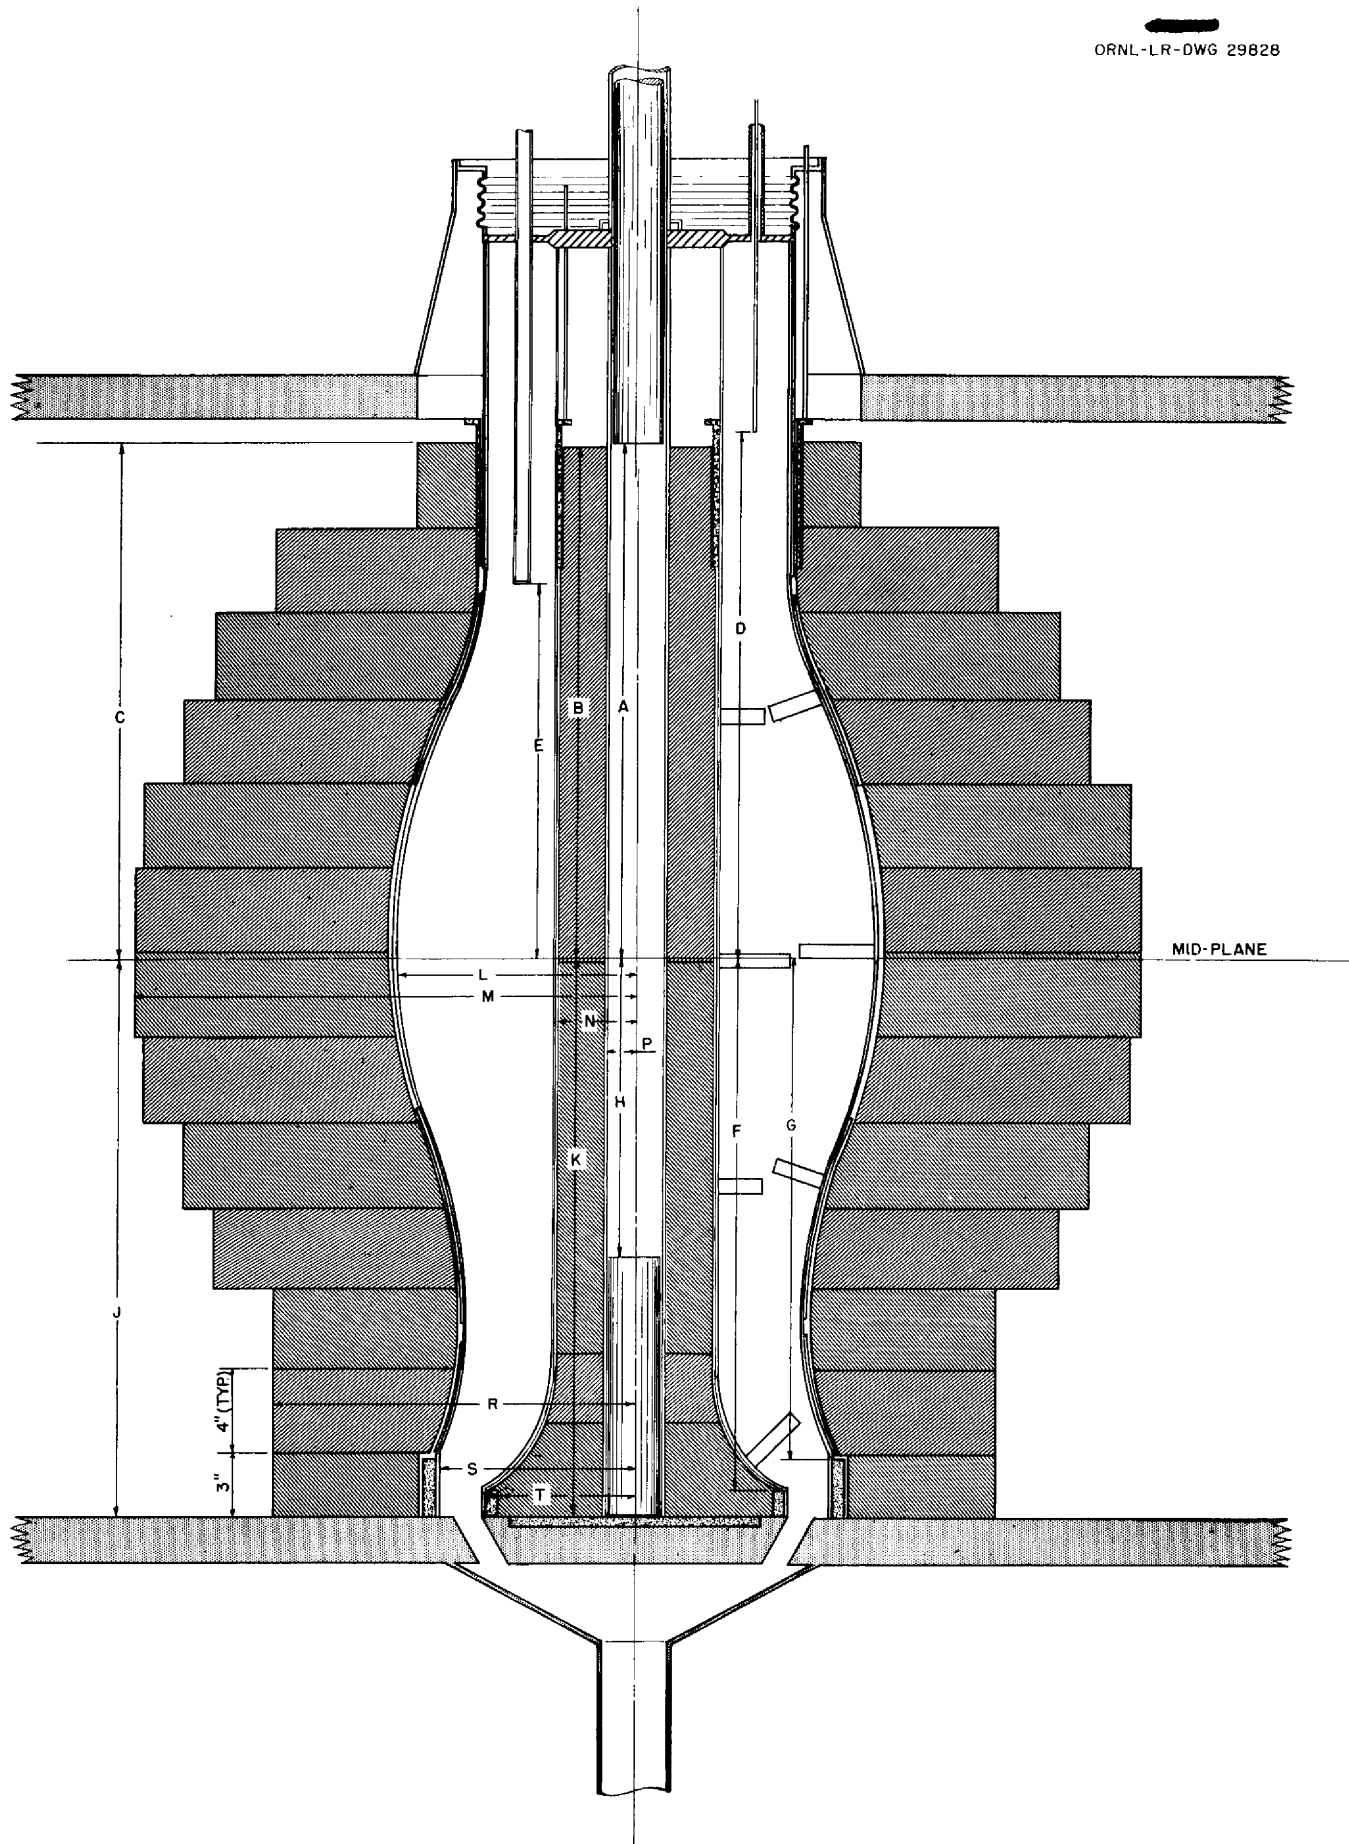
REACTOR ASSEMBLY-DIMENSIONS
